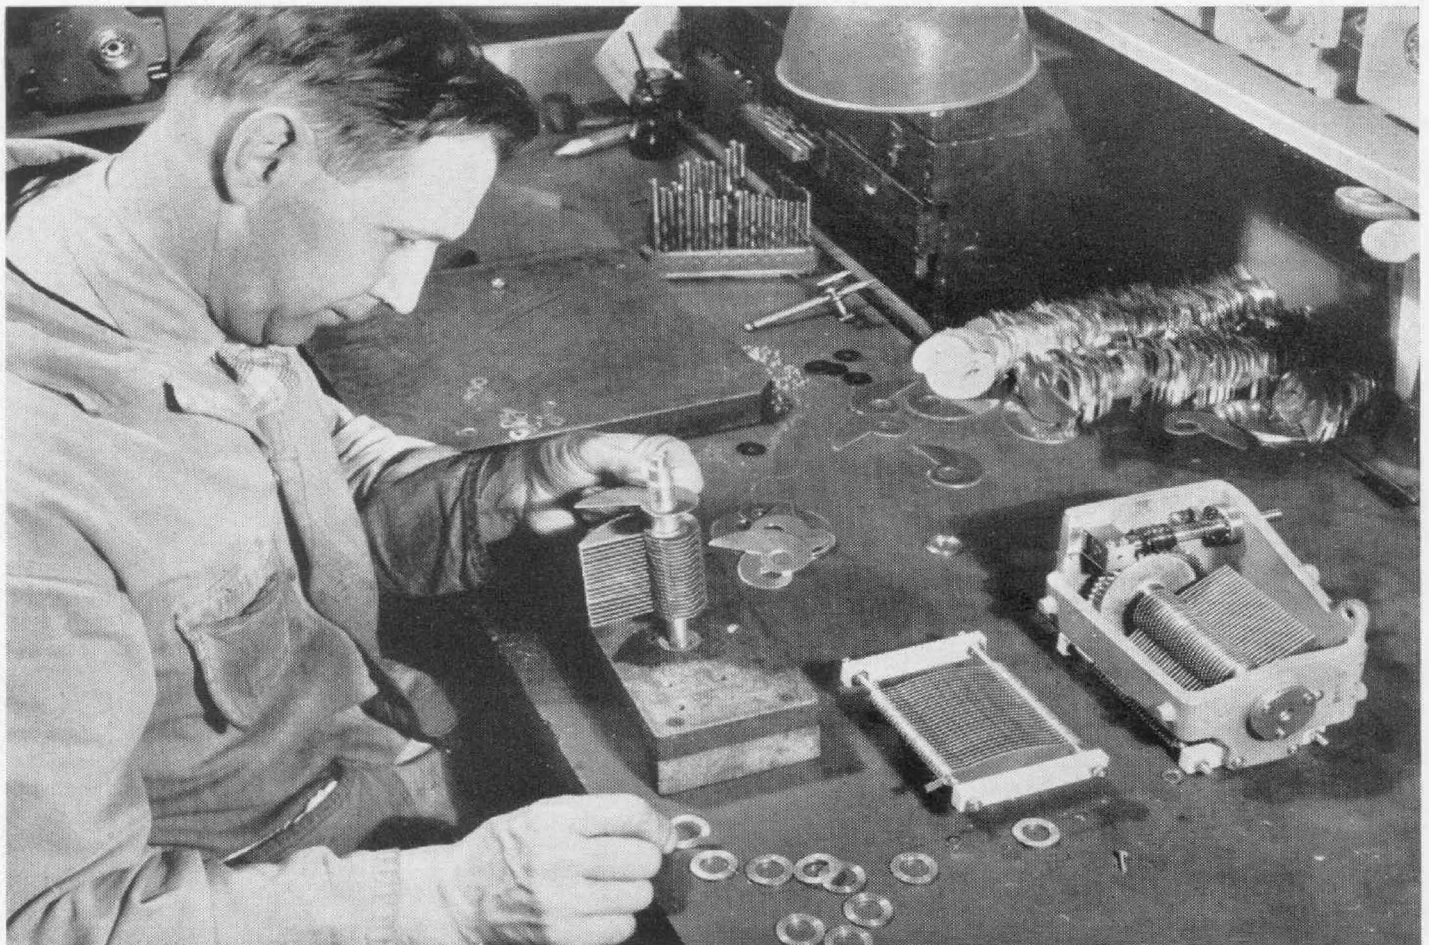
Assembling the rotor plates on the shaft. At the right may be seen a stator assembly and a completed condenser
